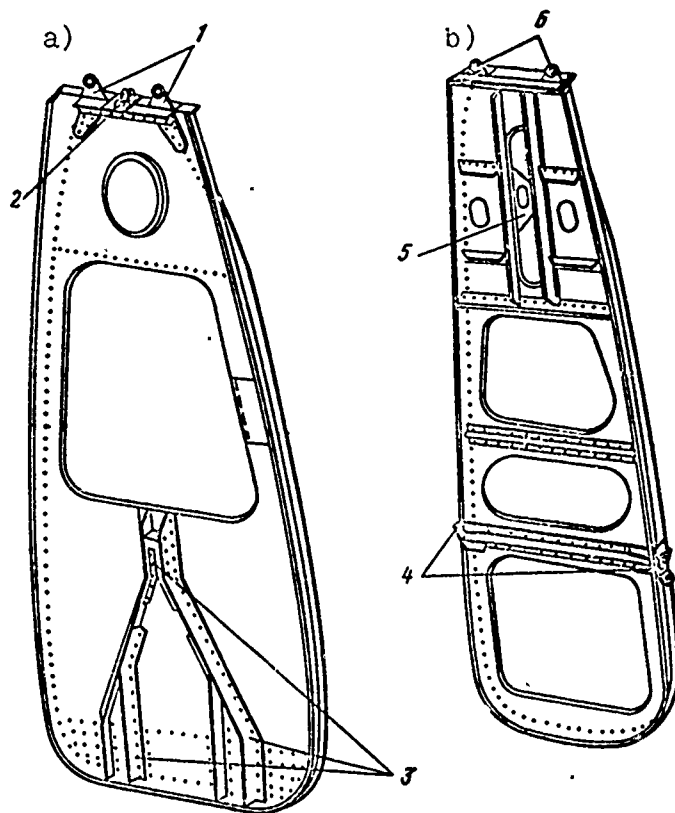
Attachment frames No. 23 (a) and No. 25 (b): 1 - front mounting lugs of the stabilizer; 2 - mounting lug of the stabilizer brace strut; 3 - stiffeners of the tail wheel installation; 4 - mounting lugs of stabilizer struts and mooring clamps; 5 - actuating arm bracket of elevator control; 6 - rear mounting lugs of the stabilizer.
